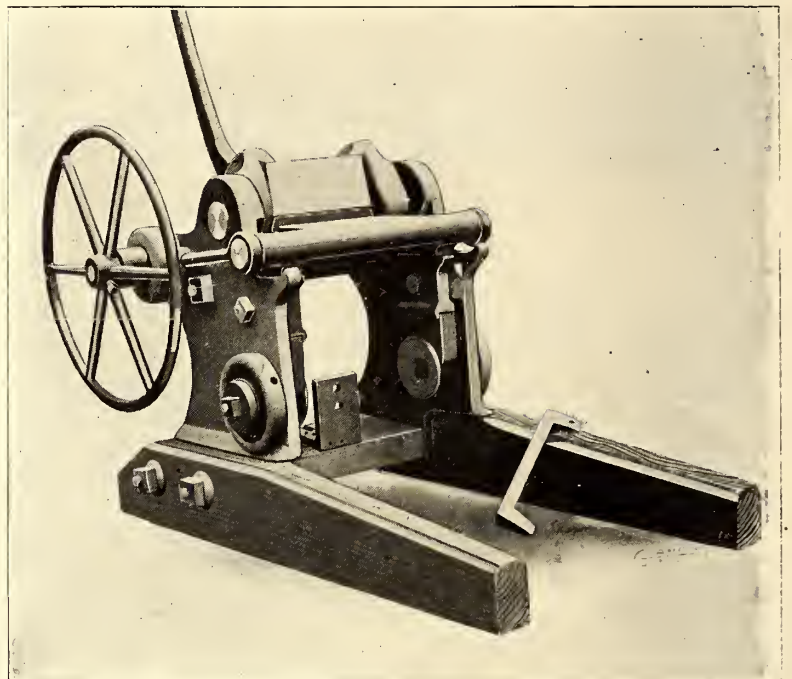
LARGE ANGLE-BENDER MACHINE, OPERATED THROUGH HAND WHEEL
